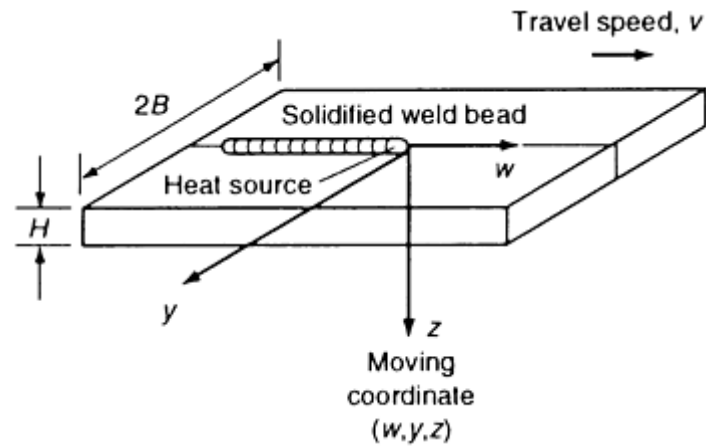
SCHEMATIC OF THE WELDING THERMAL MODEL
